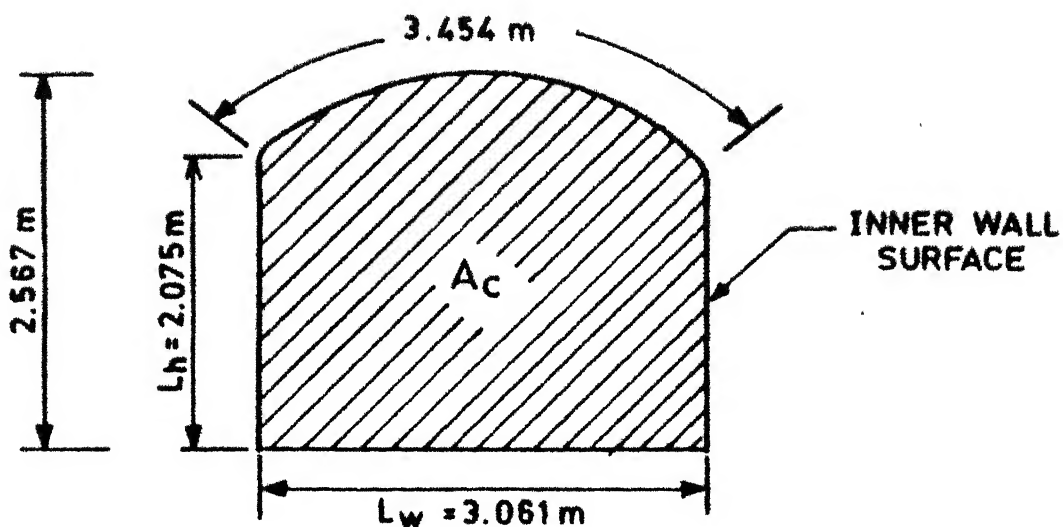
Cross-sectional view of the inside wall of railway coach.
